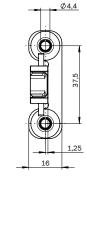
Dimensional drawing of TR110-XAS straight actuator (mm)
